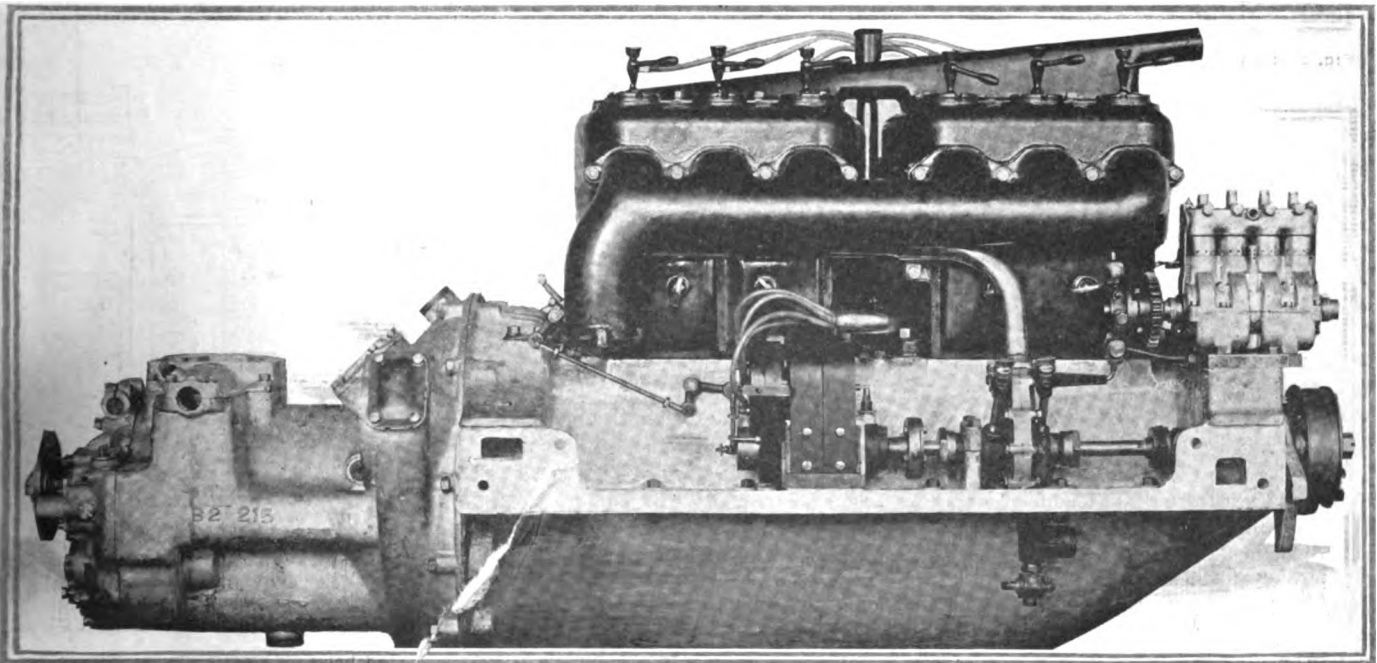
Magneto and exhaust side of motor. Note mounting of air pump and bridged water outlet manifold
